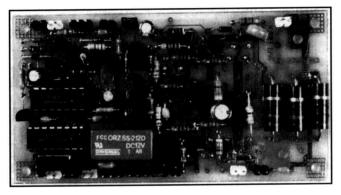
The top side of the PC board. The small power FETs are Motorola BS170.
